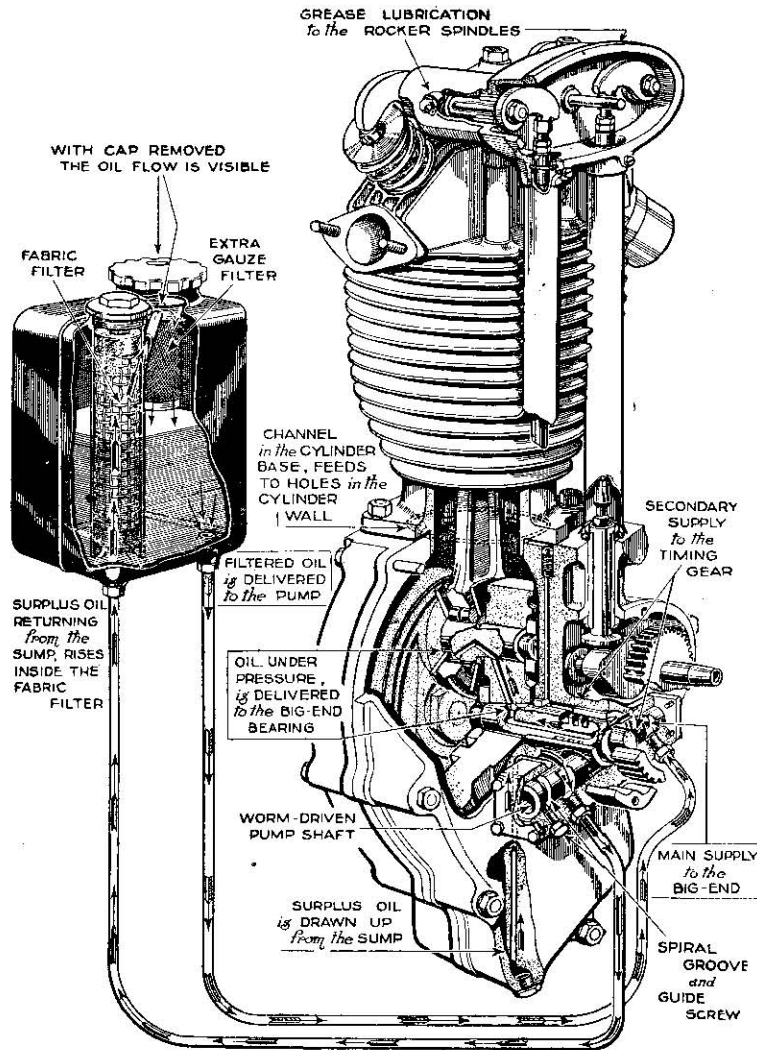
SHOWING THE DRY SUMP LUBRICATION SYSTEM ON MOST 1935-6 S.V. AND O.H.V. SINGLES
